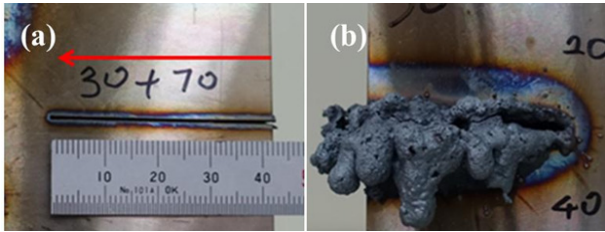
Stainless steel specimen after cutting, (a) Front, (b) Rear.
